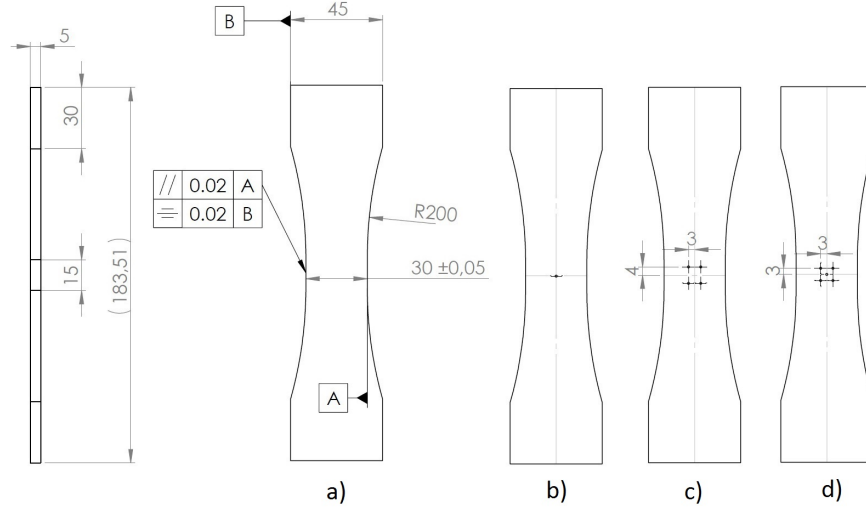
Geometry of fatigue specimens. a) smooth, b) single large defect (SLD), c) multiple large defects (MLD) and d) multiple small defects (MSD) specimens.
